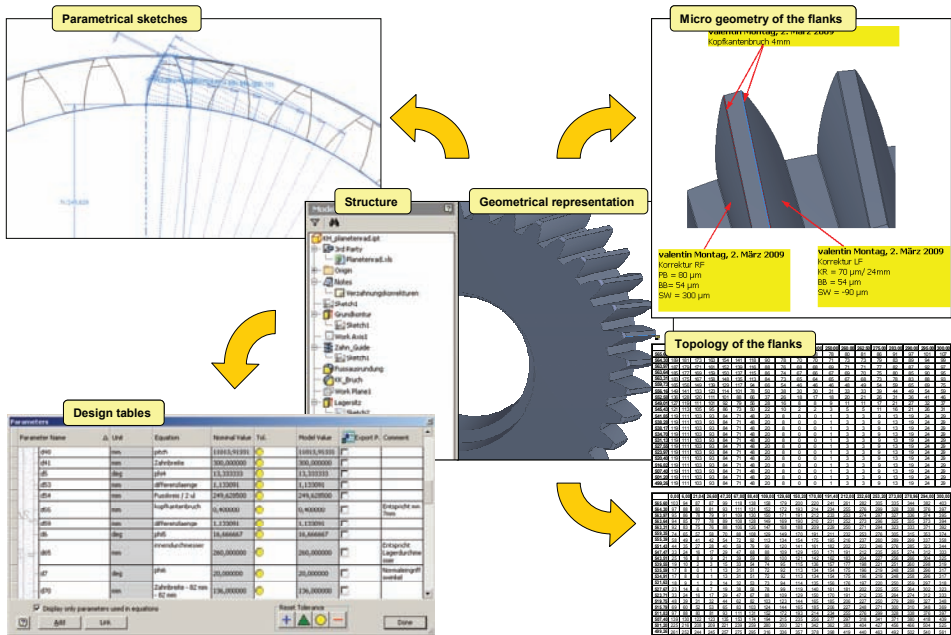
Product know-how integrated in the CAD-model of a gear wheel
